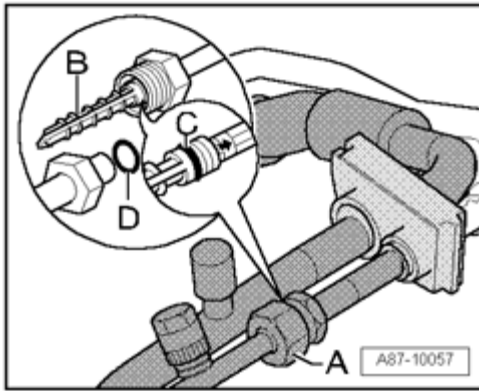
Disconnecting Refrigerant Pipe At Screw Connection (Seal Open Connections) And Pulling Restrictor Out Of Refrigerant Pipe
